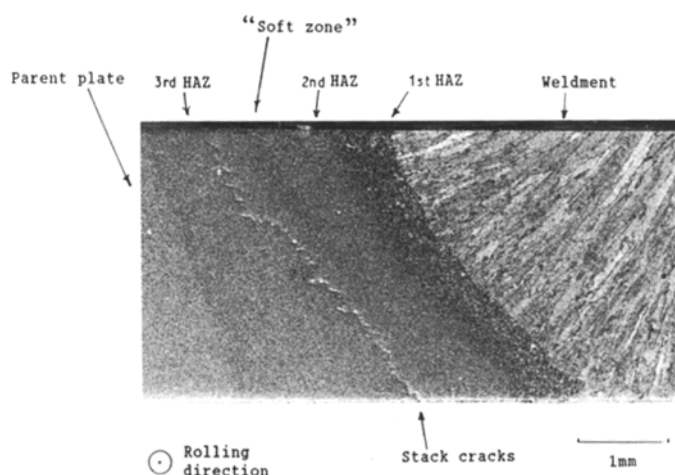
Stack cracks in relation to HAZs and weldment charged without load.
